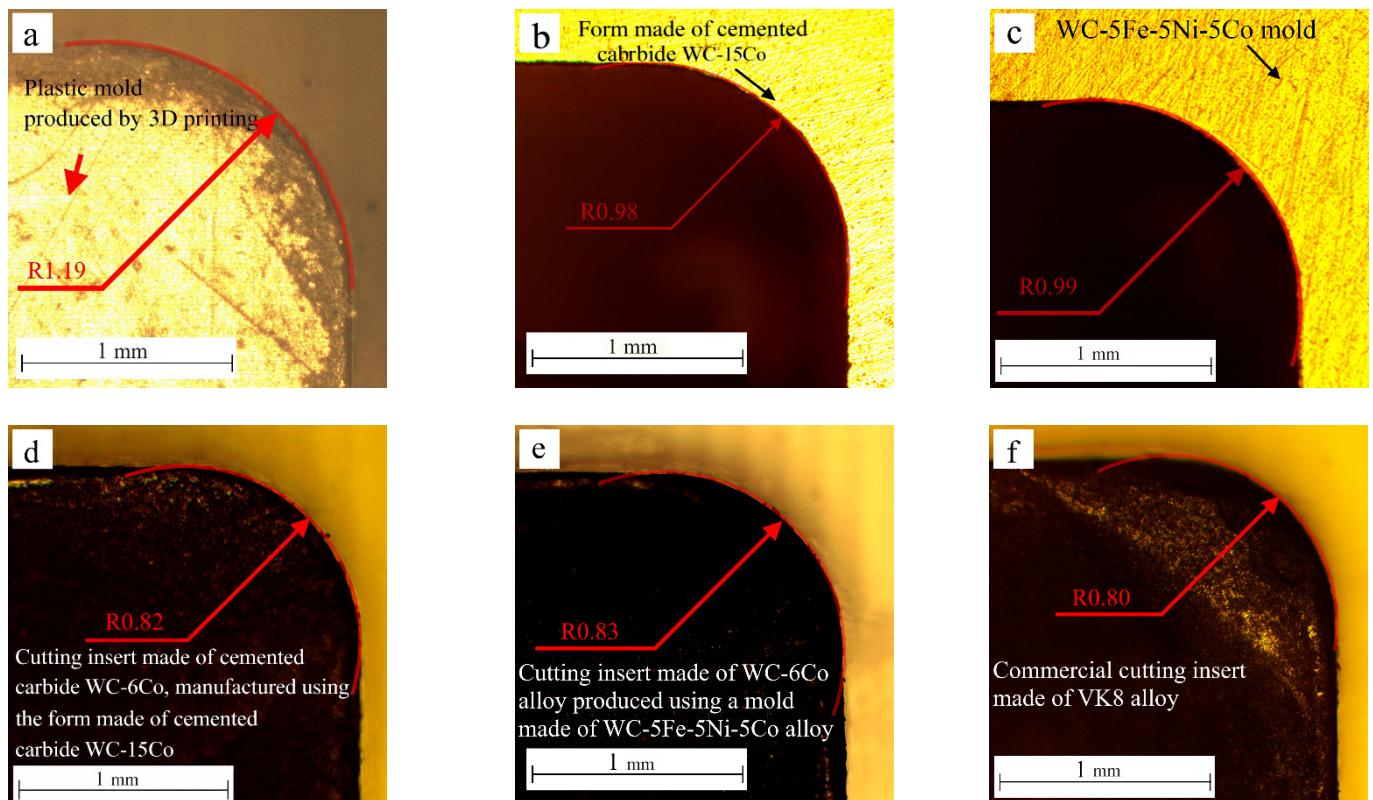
(a) Photograph of the rounded plastic die for pressing a die blank obtained by 3D printing; (b) Photograph of die for pressing cutting insert blanks from the $WC-15Co$ cemented carbide; (c) Photograph of die for pressing cutting insert blanks from the $WC-5Fe-5Ni-5Co$ cemented carbide; (d, e) Corner rounding of the manufactured cutting inserts; (f) Corner rounding of a commercial cutting insert
